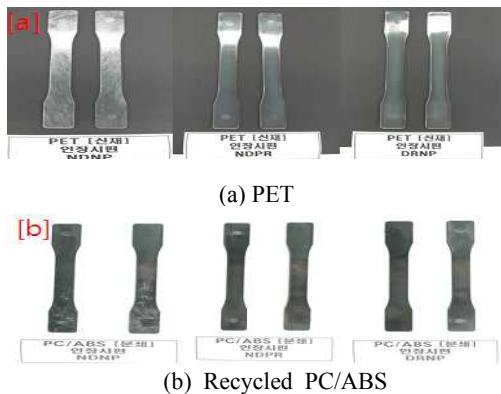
Appearance of the injection molded specimen using PET and PC/ABS and ABS
